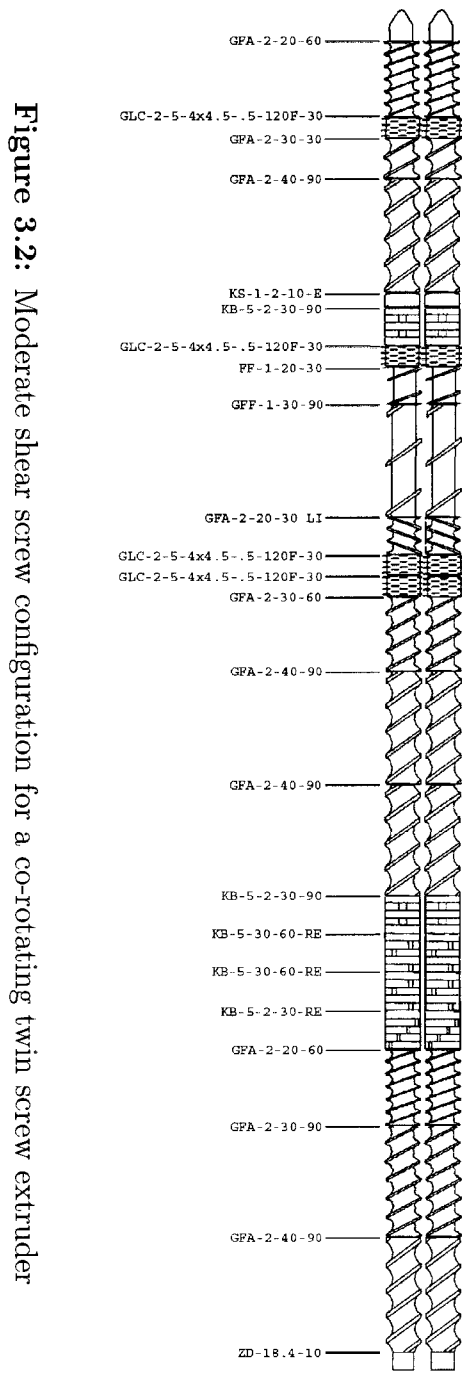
Moderate shear screw configuration for a co-rotating twin screw extruder
